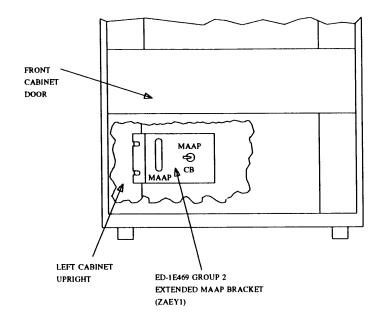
ED-1E469, Group 2 Remote Extended MAAP Bracket Mounting Location
